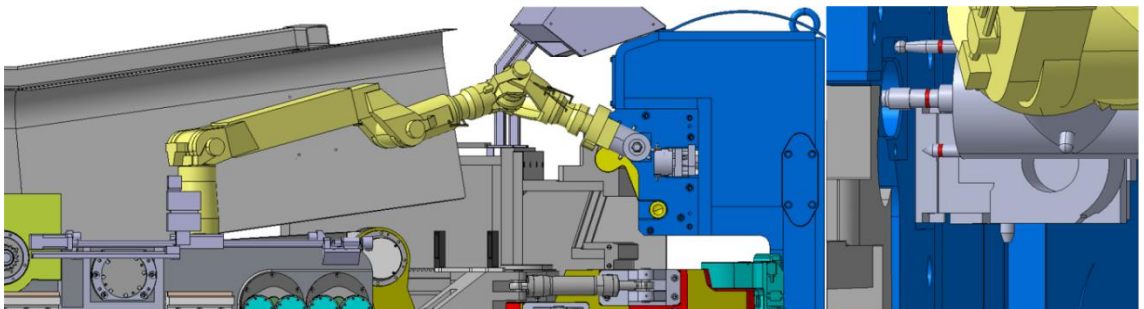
Inserting the pin tool into the pin slot and illustrated camera view
